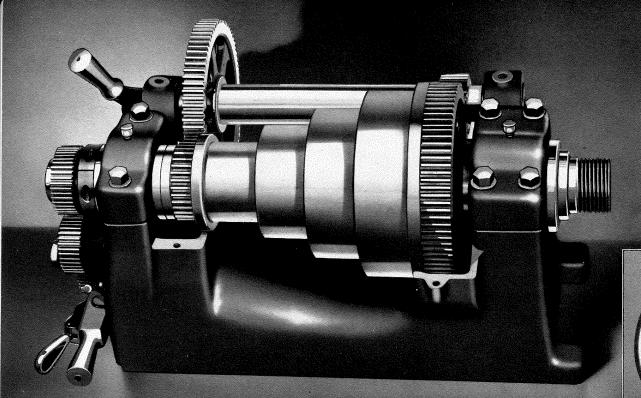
The Lathe Headstock with Gear Guards Removed to Show Back Gears
